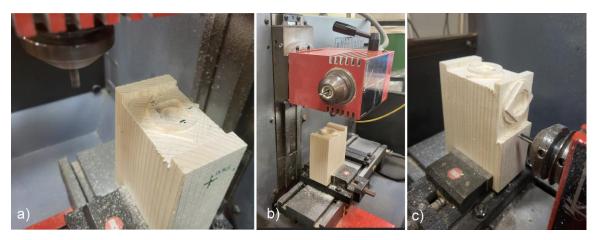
Machined test workpieces with a reconfiguring machine from vertical to horizontal
